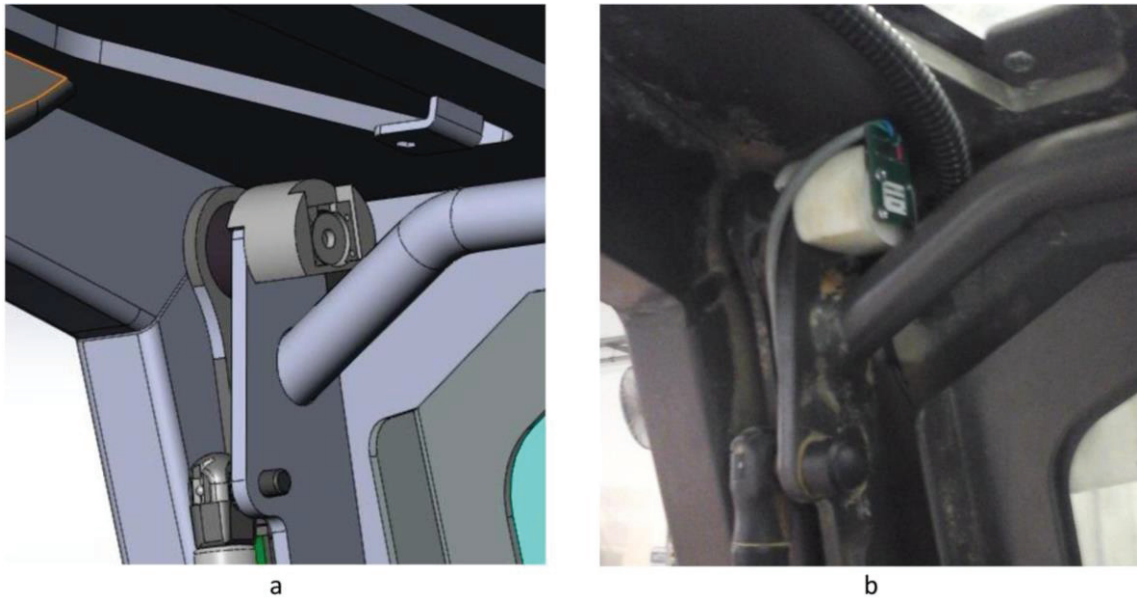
Complete Encoder Assembly: a) CAD Model, b) Photo of Actual System
